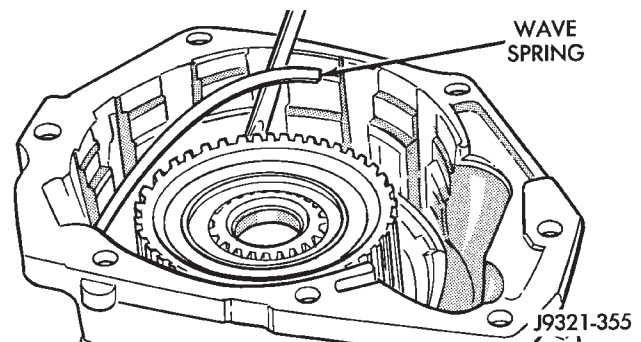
Overdrive Clutch Wave Spring Removal/Installation
